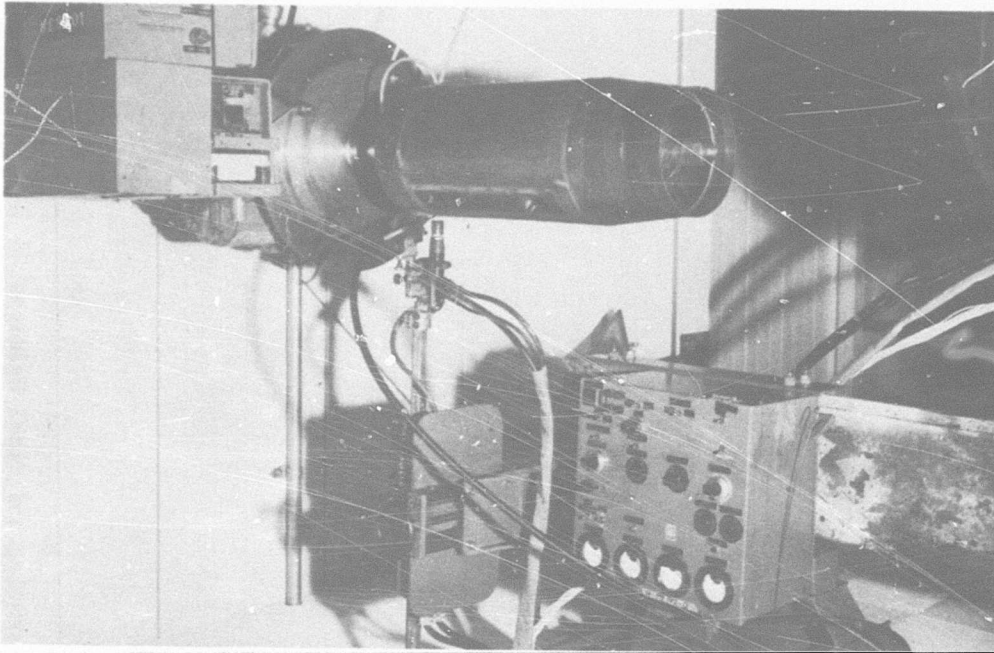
Final Weldment in Semi-Automatic Welder.
